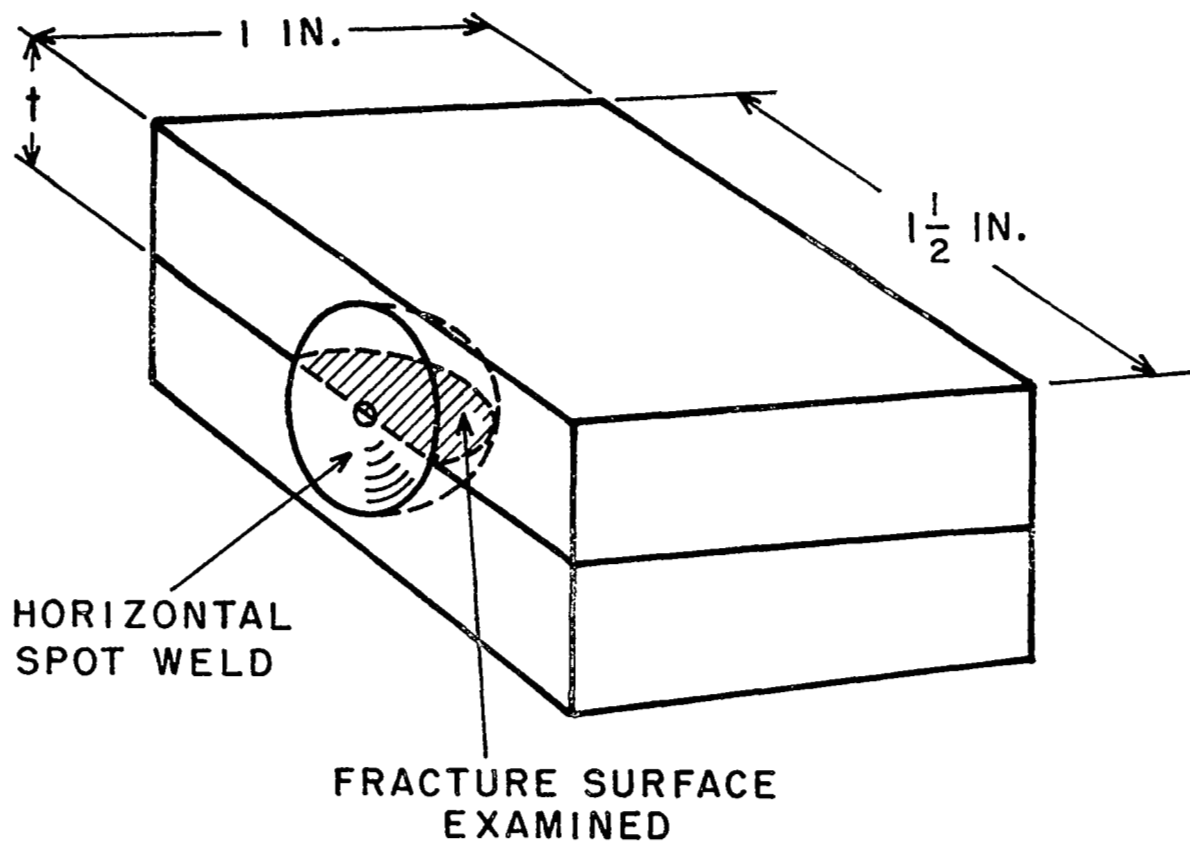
Weld test specimen for evaluating defect potential of surfaces.
